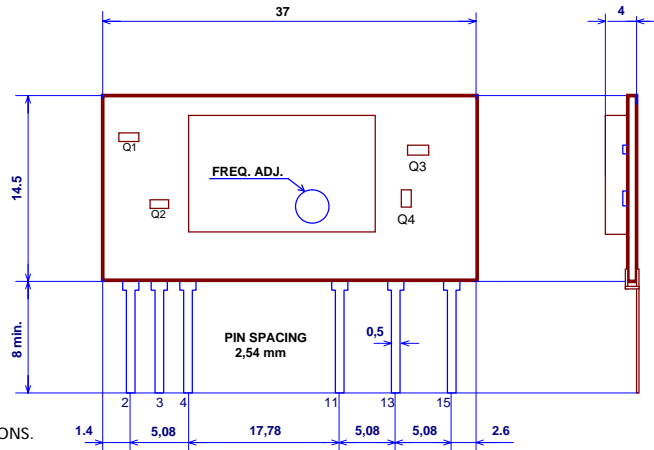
BT 58 F PHYSICAL DIMENSIONS.
